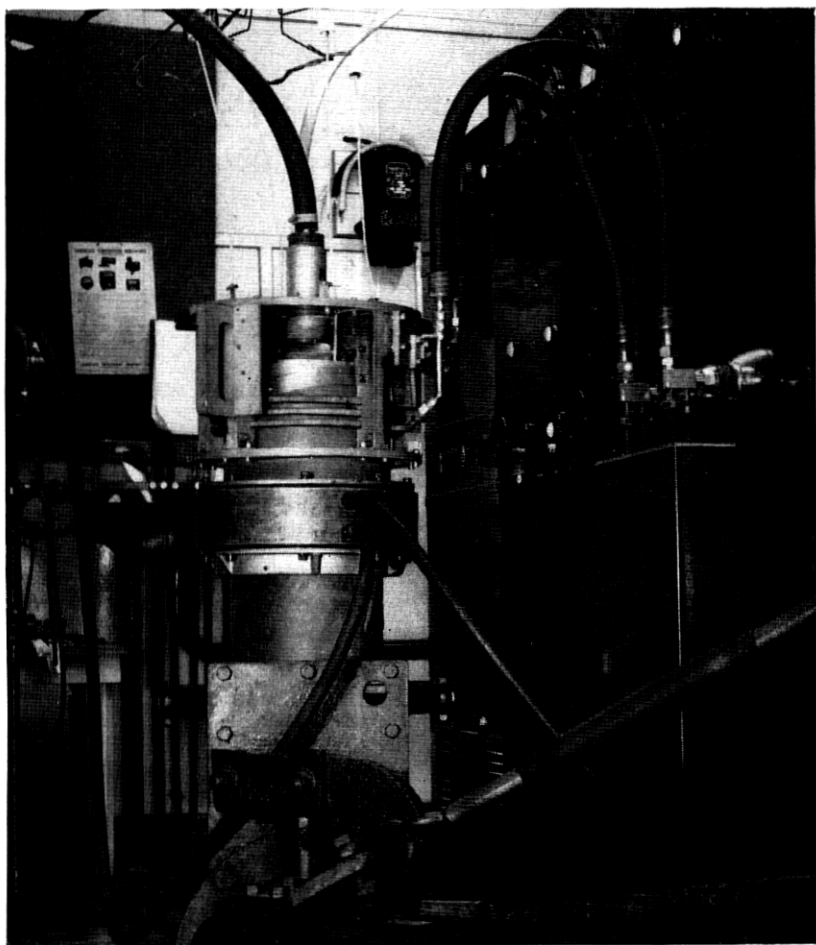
Silver-soldering of bulkhead into housing with induction heater.
